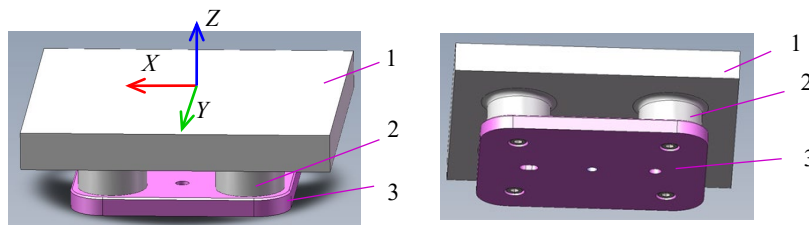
Mechanical layout of the sample assembly: top view (left) and bottom view (right)
